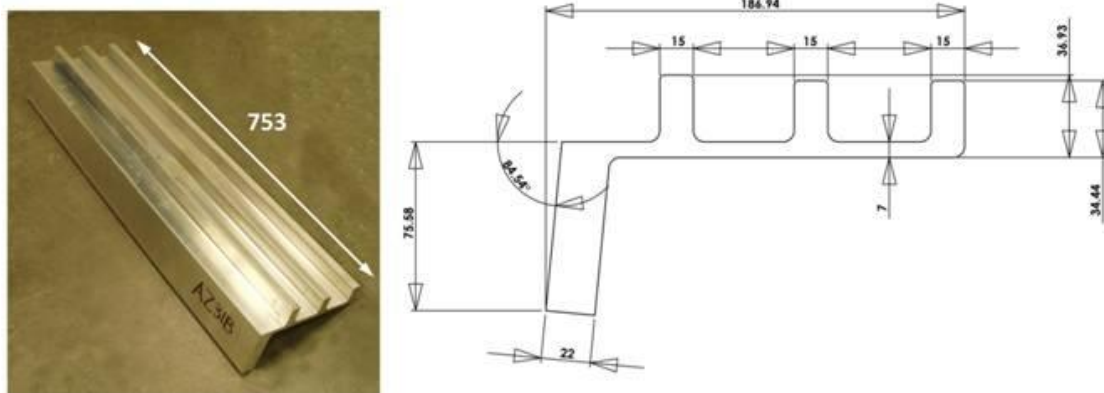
AZ31B Extrusion Piece Used for Experiments, All Dimensions in mm
